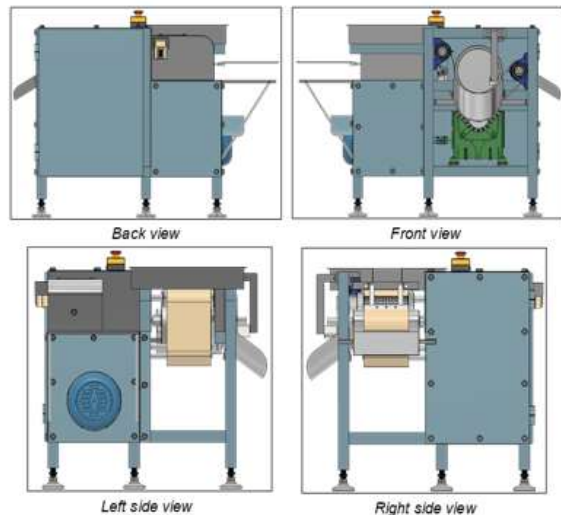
Technical Design of Semi-Automatic Deboning Processing Machine
